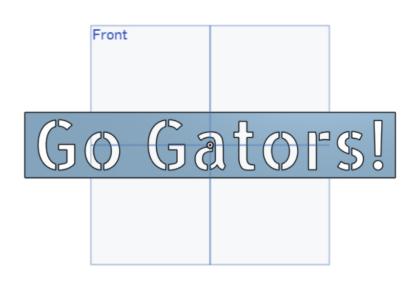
Front Onshape Drawing of Stencil 1 "Go Gators!" design
